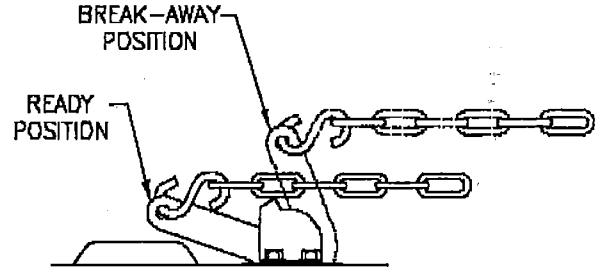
SAFETY CHAIN ATTACHMENT (TOP VIEW SHOWN)
